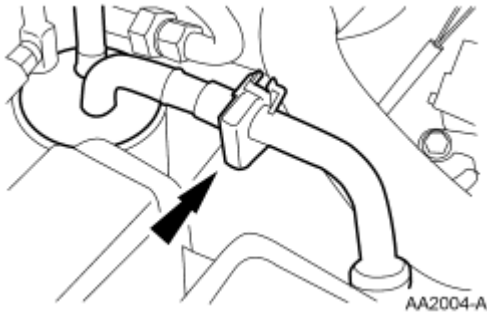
Locating A/C Manifold & Tube At Accumulator
